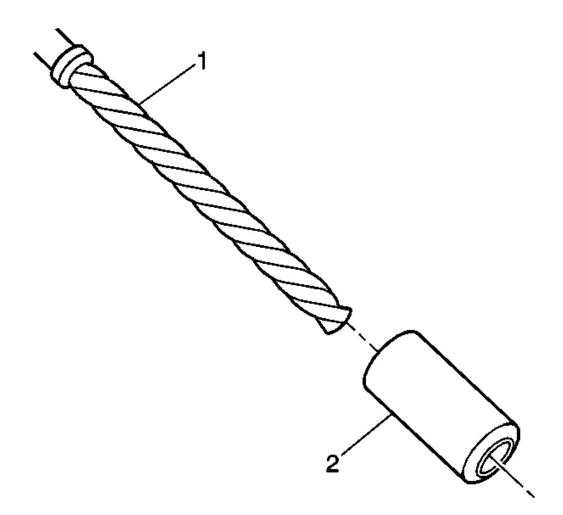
View Of Stop Collar & Counterbore Drill Courtesy of GENERAL MOTORS CORP.
